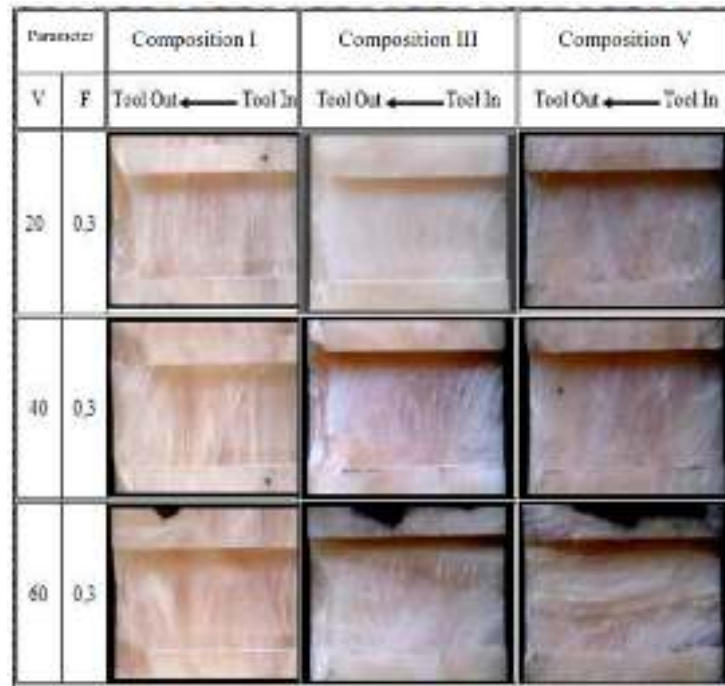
Surface results from machining carried out with an end-mill at various cutting speeds and fiber composition. V, cutting speed and F, Feeding
